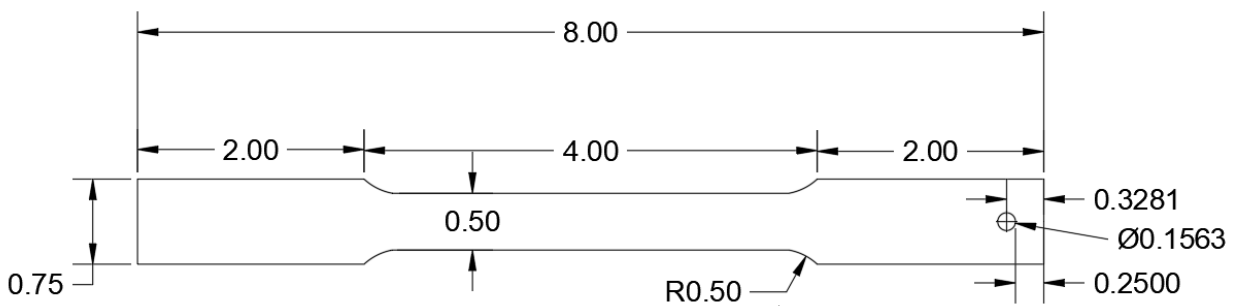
Steel coupon dimensions for 1100 aluminum sample (inches)
